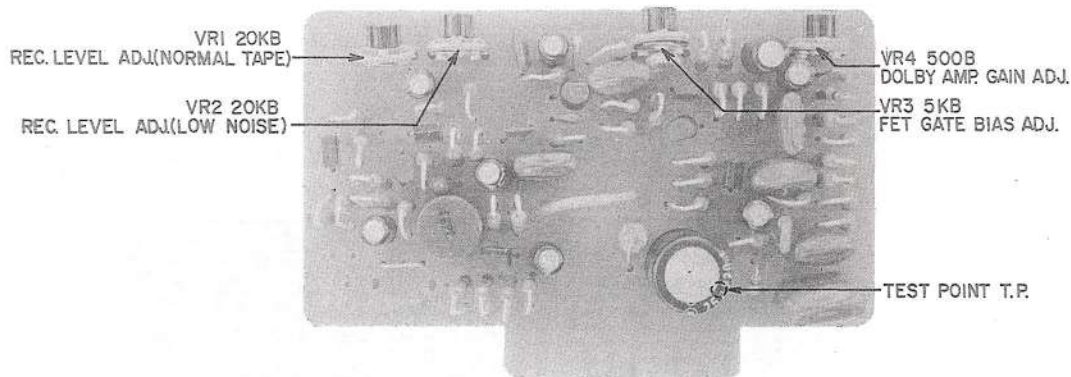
REC. DOLBY AMP. P.C. BOARD (FACE SIDE)
